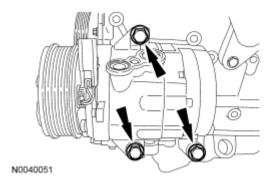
Locating A/C Compressor Bolts Courtesy of FORD MOTOR CO.
